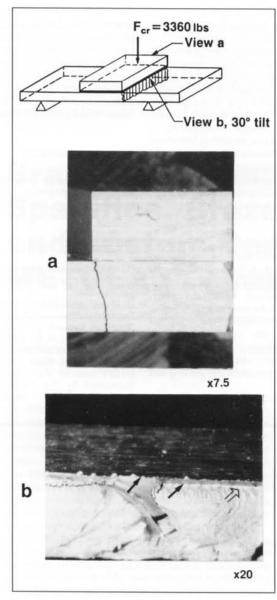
The fracture face of the K68 joint brazed with METGLAS MBF-1011 filler metal. The brazement was produced with a narrow brazing gap and without fillets. The fracture starts mostly within the brazement perimeter. Some cracks originate in a few small individual drops of the excessive brazing filler metal.
